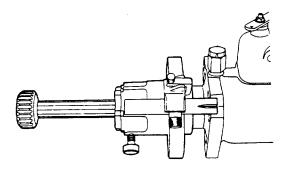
Checking Timing Mark on Fuel Pump Flange.
